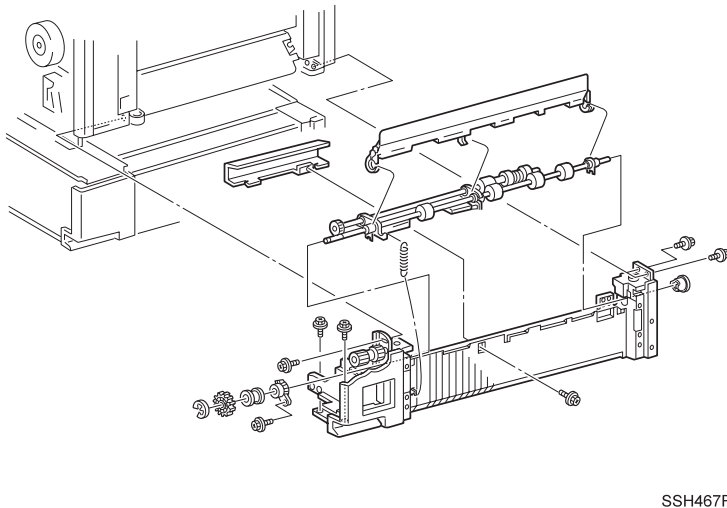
Removal of Tray1 Take Away Roll Assembly
